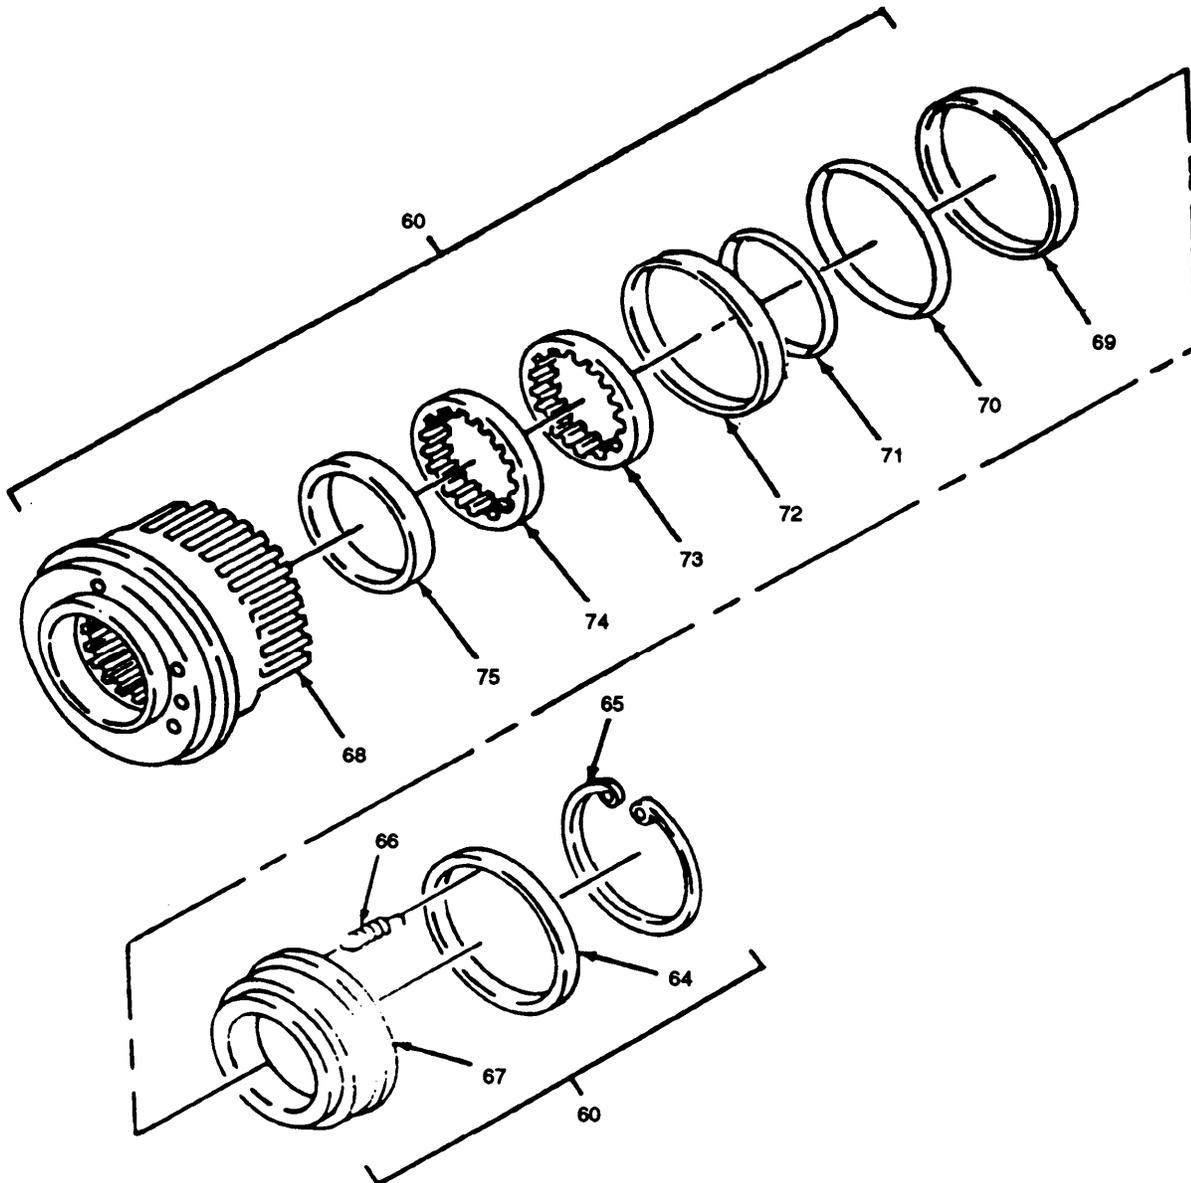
Winch Assembly Model PG-115-043R, Reassembly (Sheet 1 of 7).
